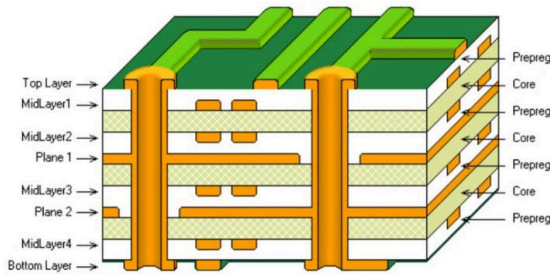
Cross-sectional diagram of a PCB's multiple inner layers
